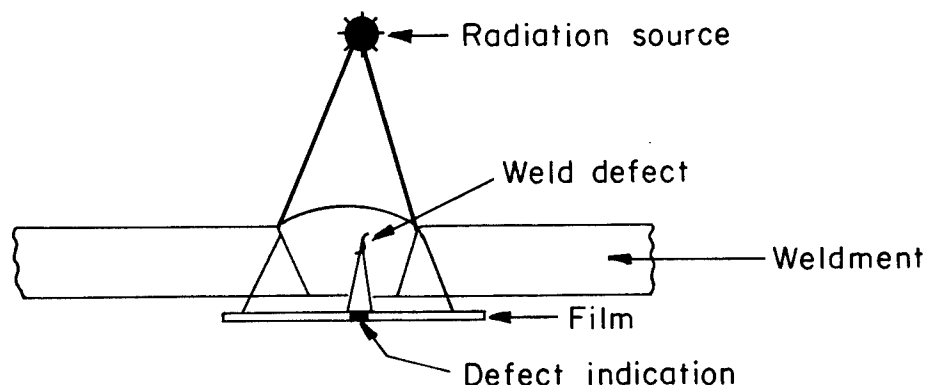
SCHEMATIC REPRESENTATION OF THE DETECTION OF WELD DEFECTS BY RADIOGRAPHY
